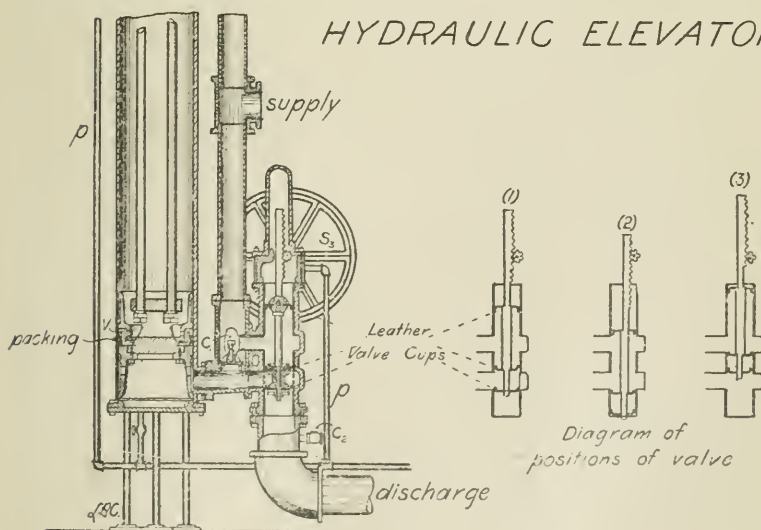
SIDEWALK LIFT HYDRAULIC ELEVATOR.
